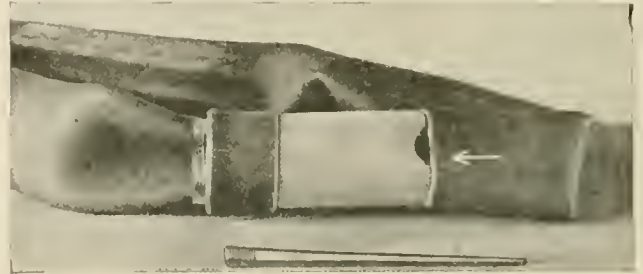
OTHER END READY TO BE PULLED ON EXPANDER
